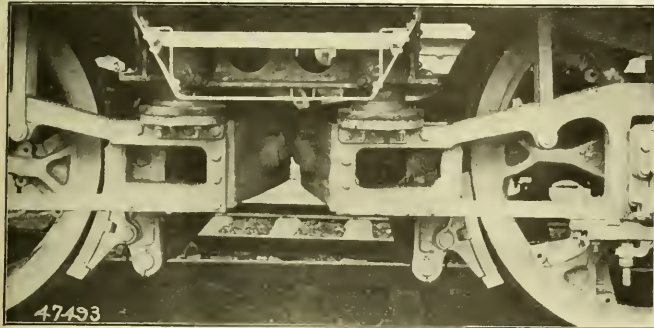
SPRING BUFFERS AND BUMPER GIRDERS.
